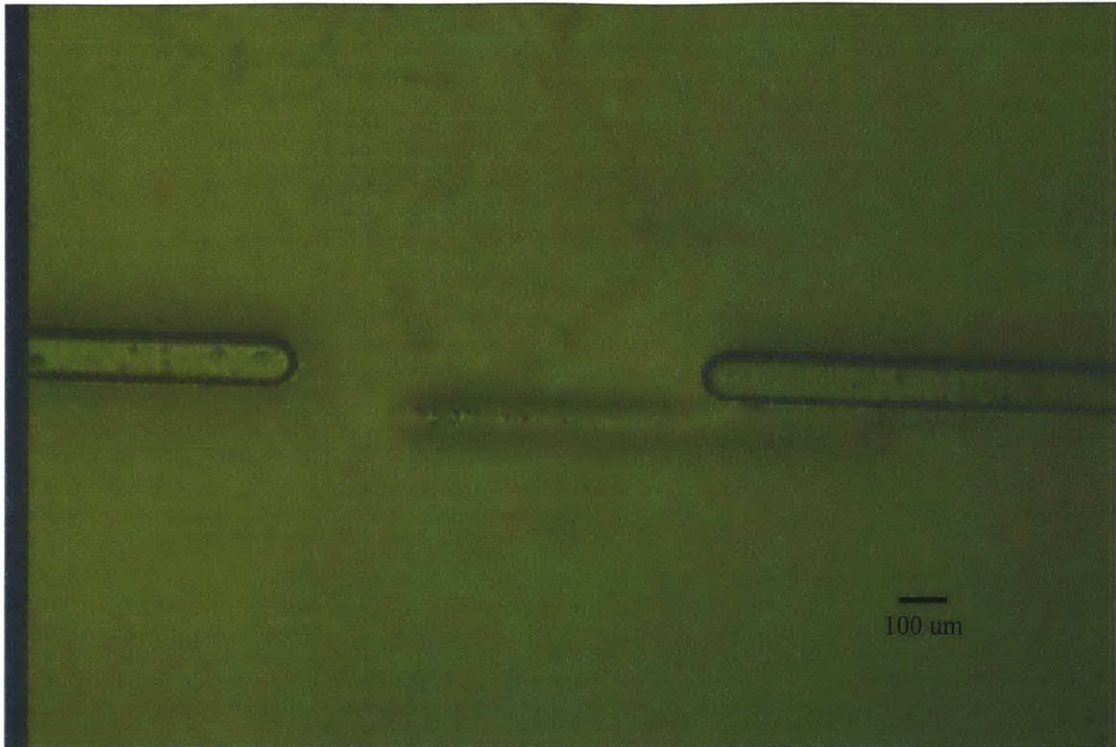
The G2V1 bottom mold, after demolding, showing a shadow of where the top mold was in misaligned contact during molding of the sandwich layer.
